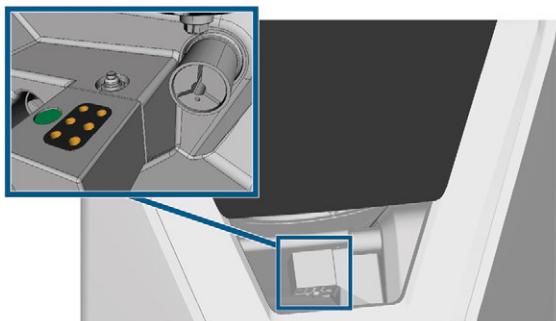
TOOL MAGAZINE WHICH IS MOUNTED TO THE TOOL MAGAZINE HOLDER; TOOL POSITIONS MARKED ORANGE
